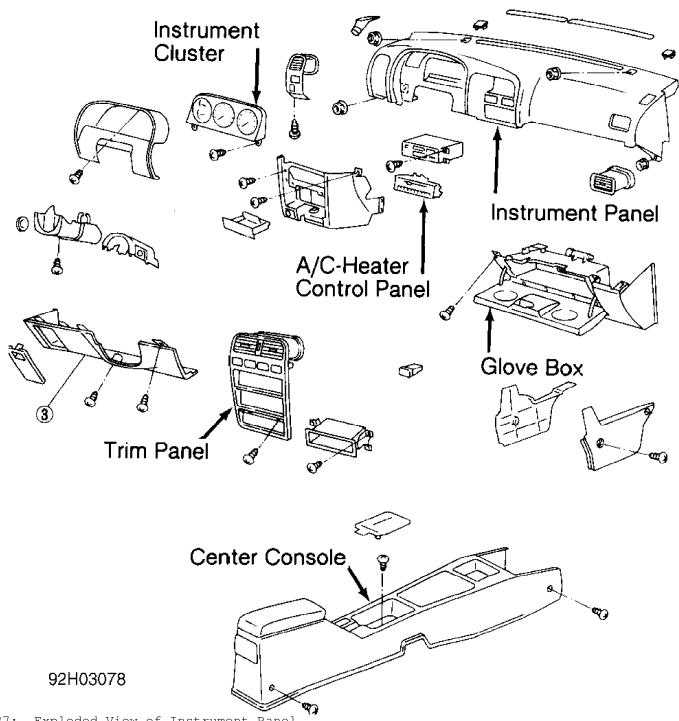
Exploded View of Instrument Panel Courtesy of Nissan Motor Co., U.S.A.
